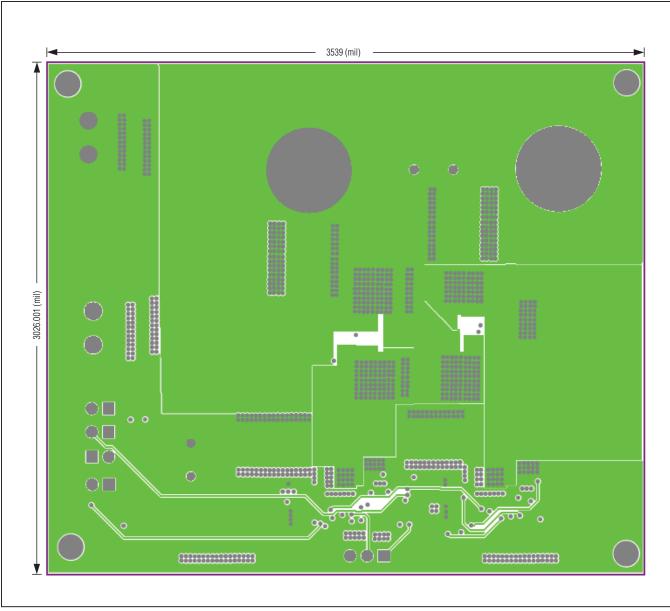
MAX8686 EV Kit PCB Layout—Layer 4 (VOUT, PGND, and LX)
